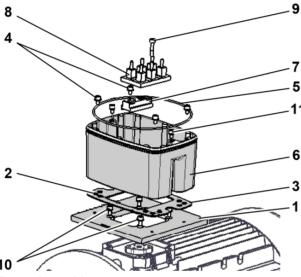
Assembly sequence: Connection box – adapter plate, size D
